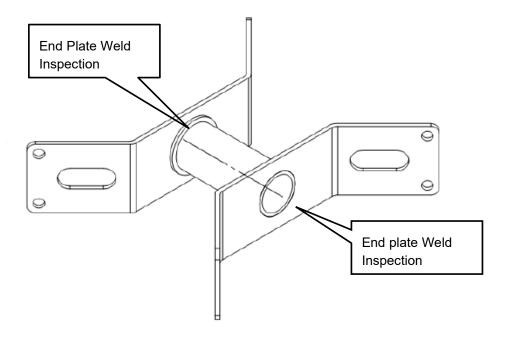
Isometric view of Hanger Assembly P/N CB8504 and weld inspection locations Photo Reference: Cameron Balloons SB 28 Rev 0
